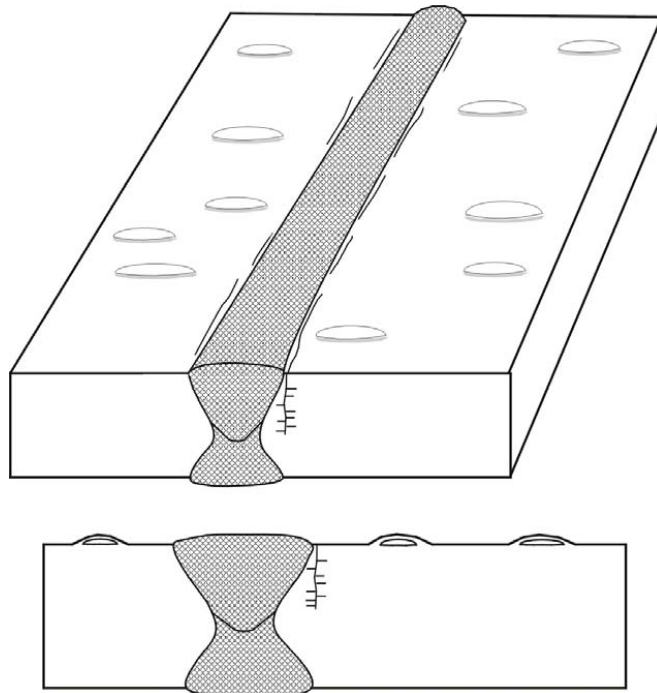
Hydrogen blistering shown with accompanying SOHIC damage at the weld [8].
